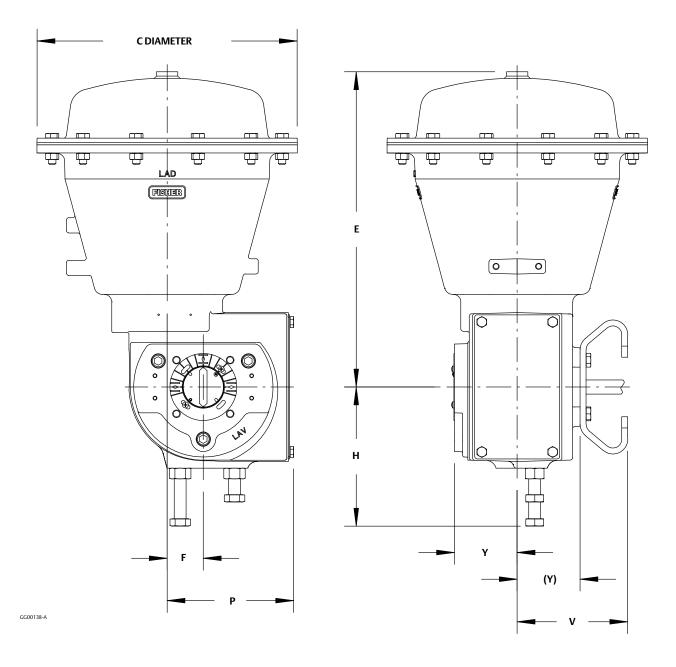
Handwheel Dimensions (also see tables 6 and 9)
